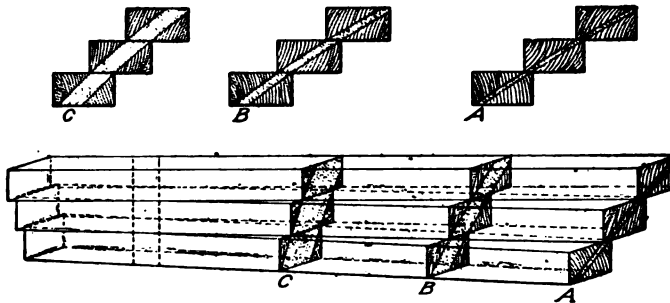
Method of Fitting Blocks from Which Propeller is Shaped
